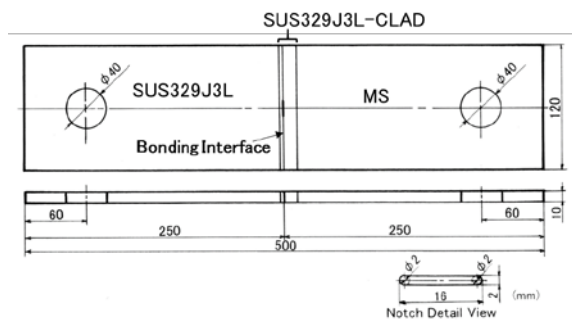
Shape and size of CCT type specimen for fatigue crack propagation test
